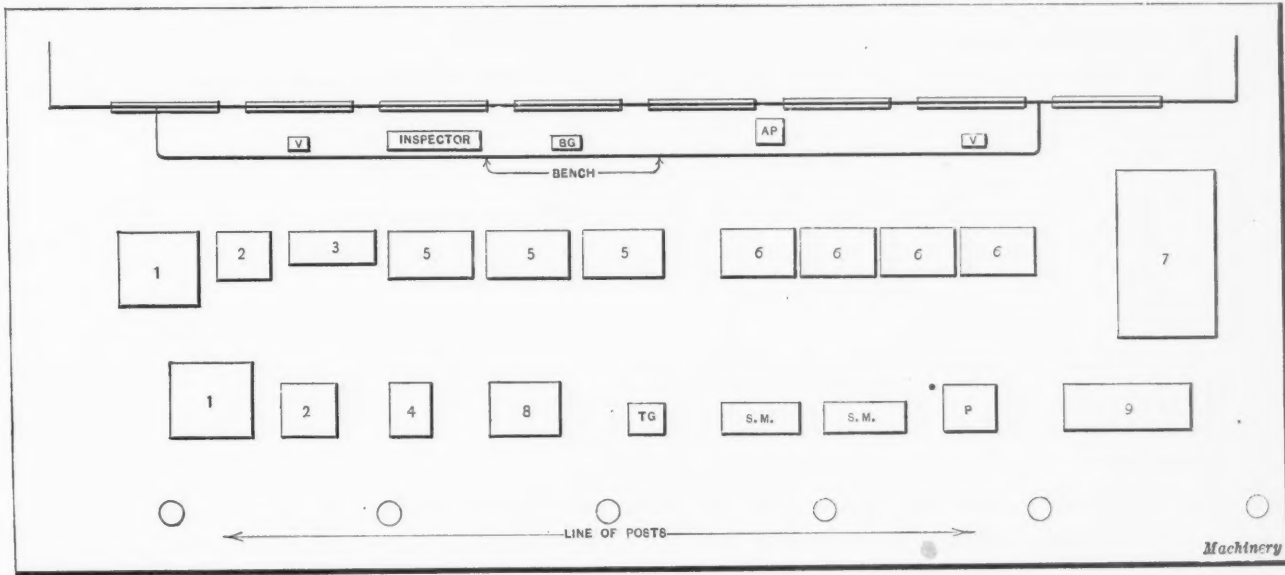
Lay-out of Machine Equipment in the Department where Gasoline-savers for Ford Carburetors are made
